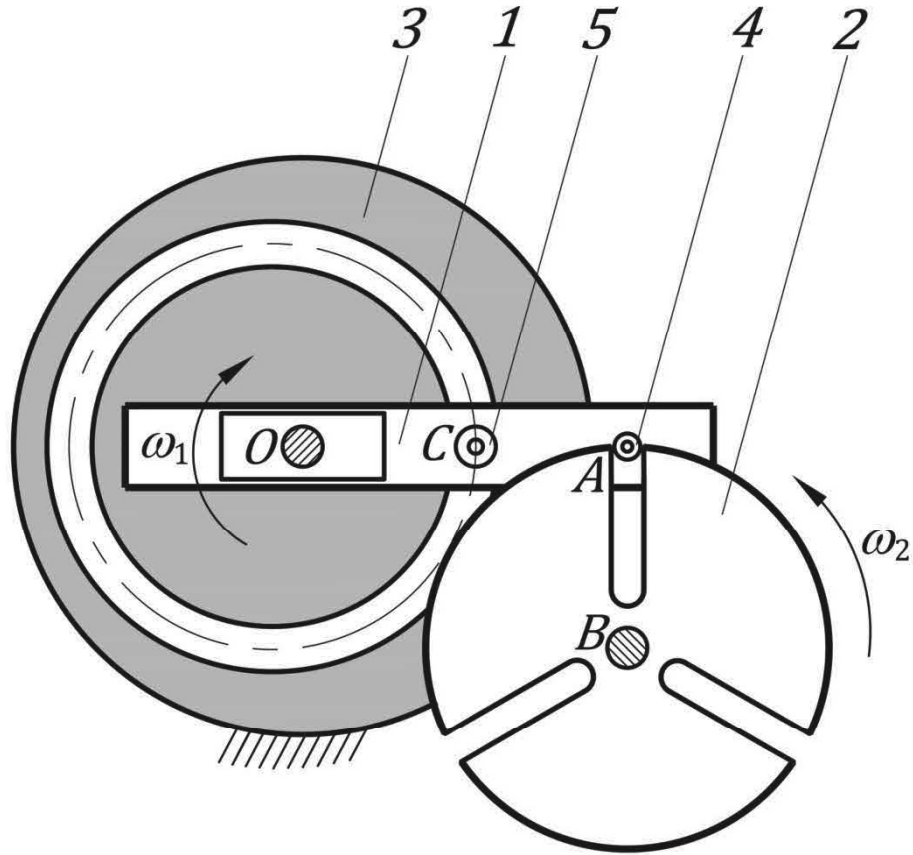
General schematic of the groove cam Geneva mechanism: input crank 1, output wheel 2, groove cam 3, driving pin 4 and roller follower 5
